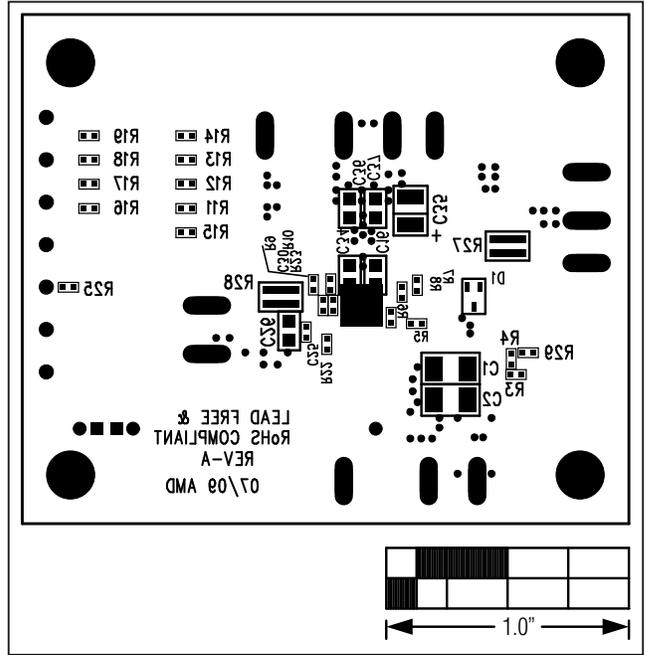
MAX17019N EV Kit Component Placement Guide—Solder Side
